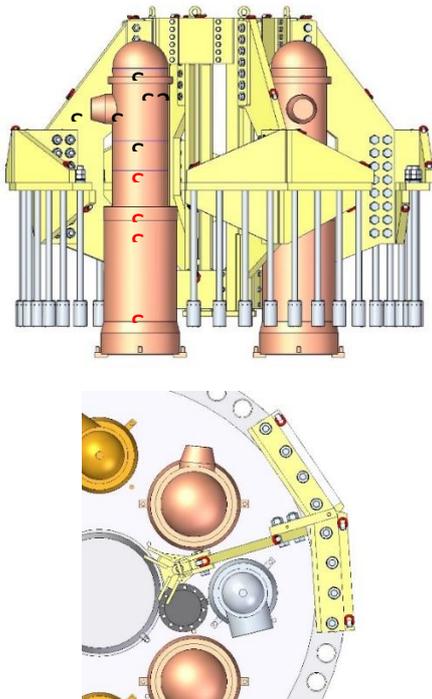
Elevation and plan of ESR in pod showing positions of superheater welds
